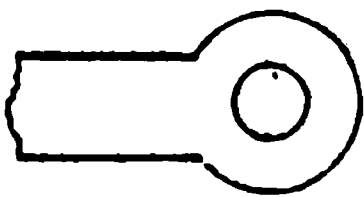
One end of an eye-bar used in tension members of bridges and roofs.
